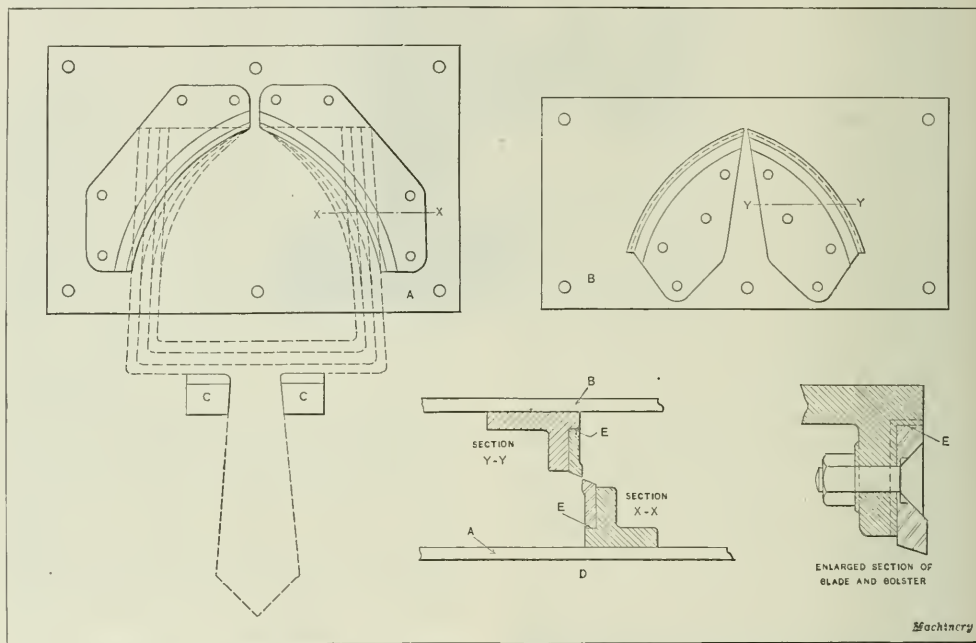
Arrangement of Blades of Trimming Dies used in the Manufacture of Shovels
